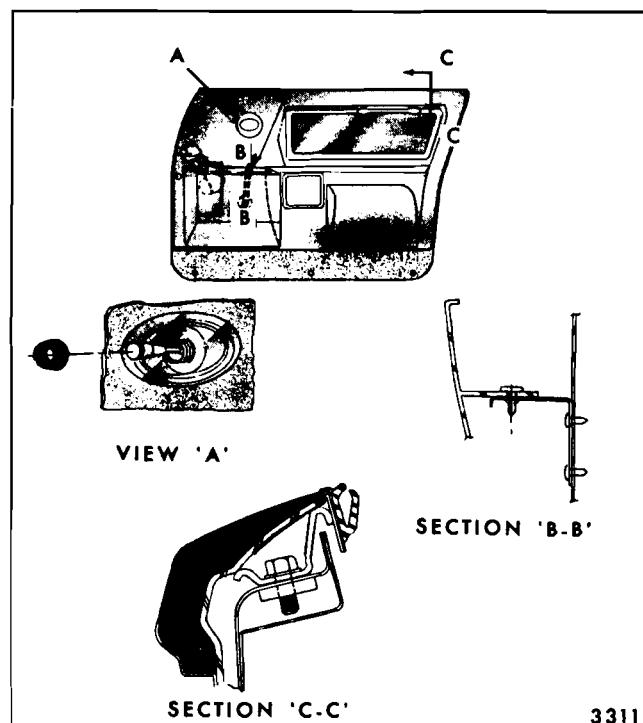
Door Trim Panel Removal - Pontiac Styles
